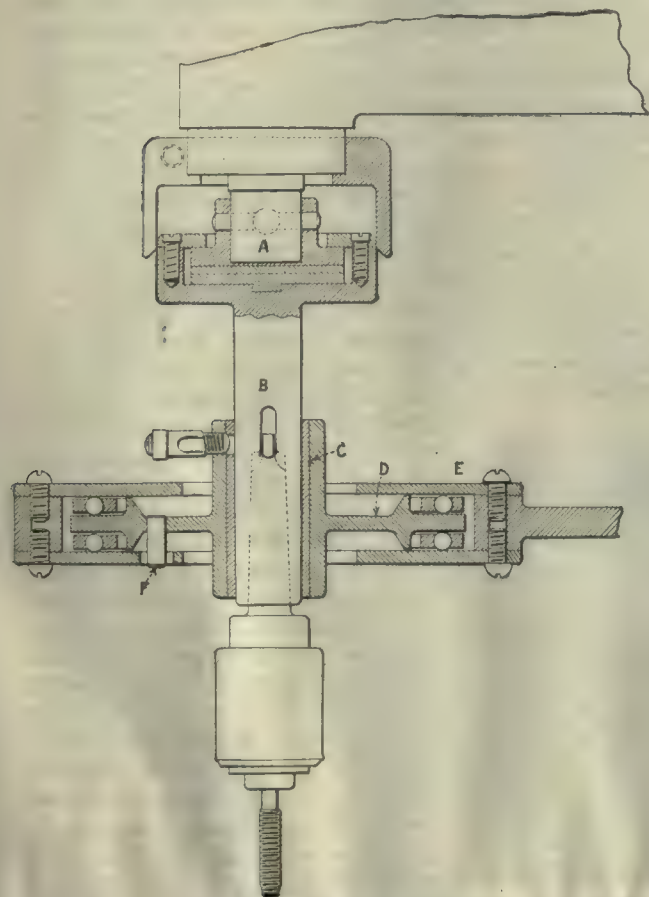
FLOATING HEAD FOR TAPPING MACHINE
